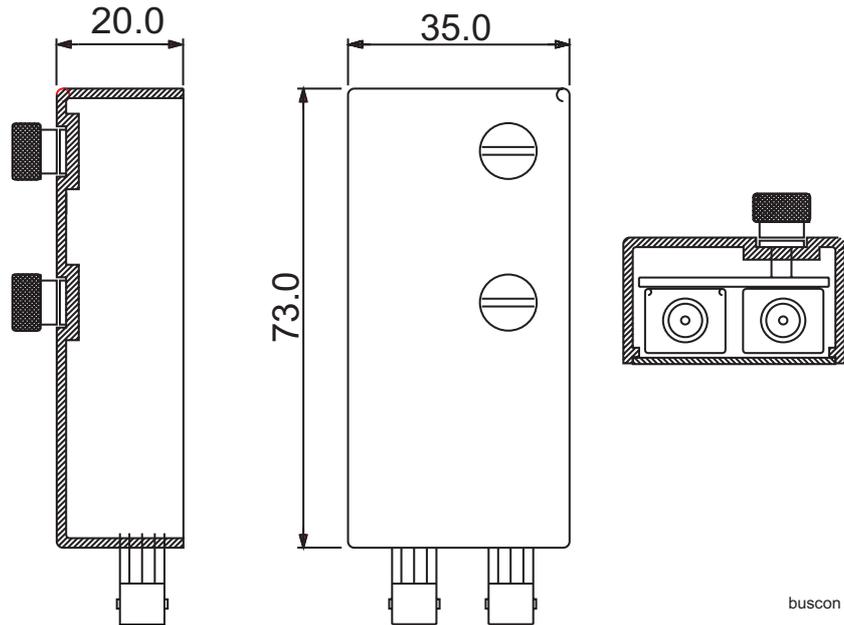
1 Dimensional drawing of the bus connection module RER 117
